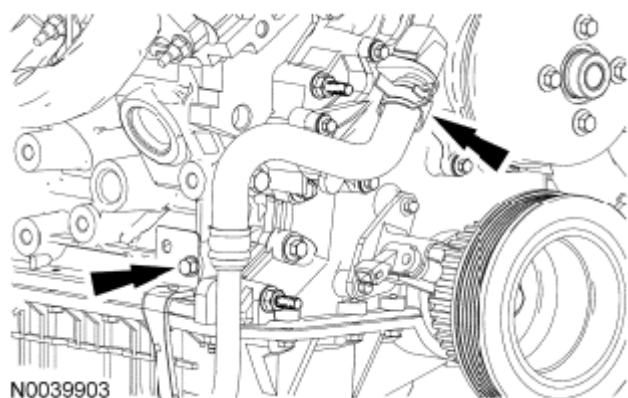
Locating Oil Cooler Hose Bracket Bolt
